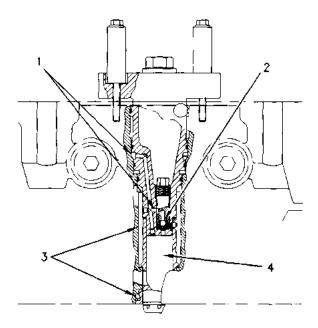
PC Check Valve and Fuel Supply Path (1) Fuel inlet passage. (2) Check valve. (3) Passageways for the jacket water coolant. (4) Precombustion chamber.
